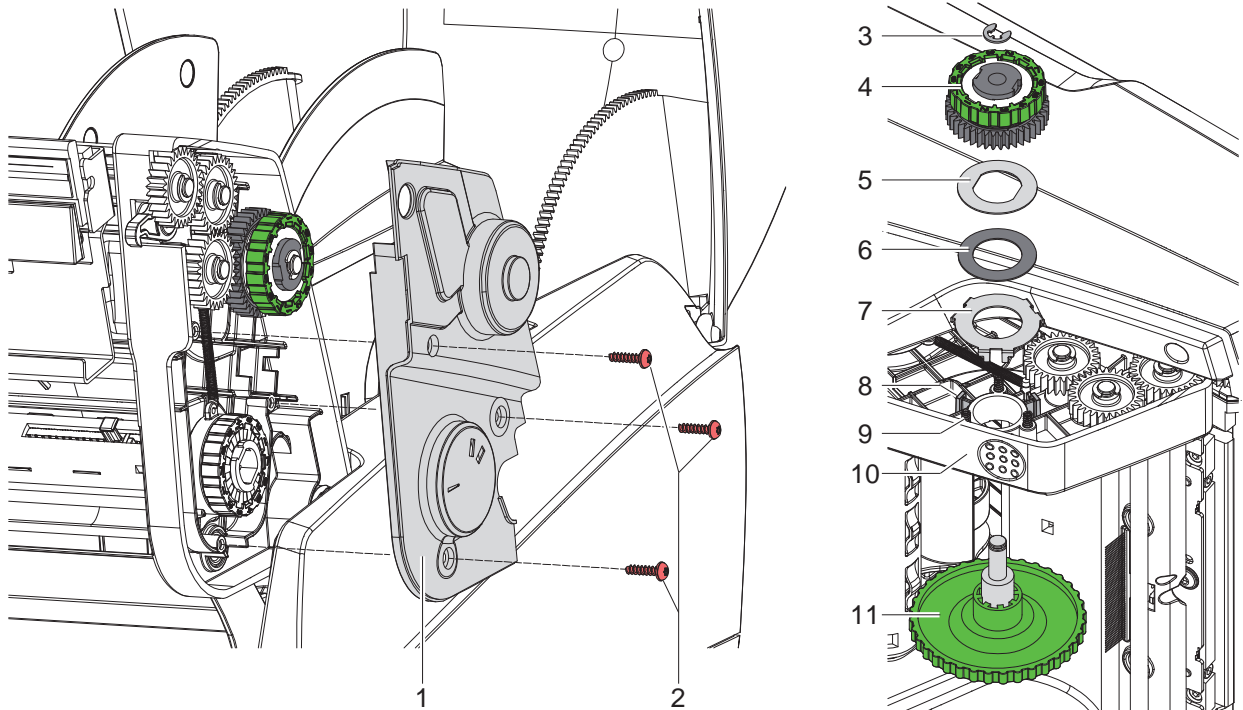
Changing the clutch and brake of the ribbon rewinder
